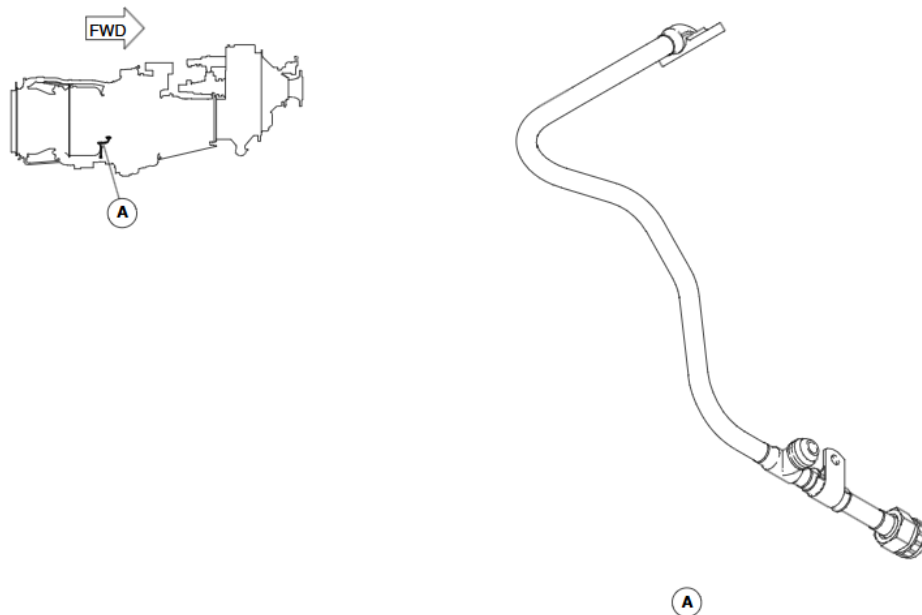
P3 Air Separator to P2.7 Bleed Valve Air Tube
